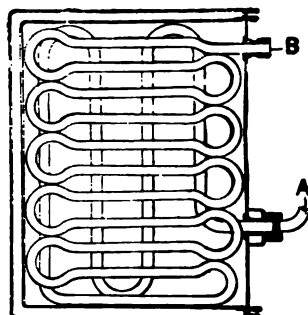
Plan of Serpollet Generator, showing arrangement of coils
